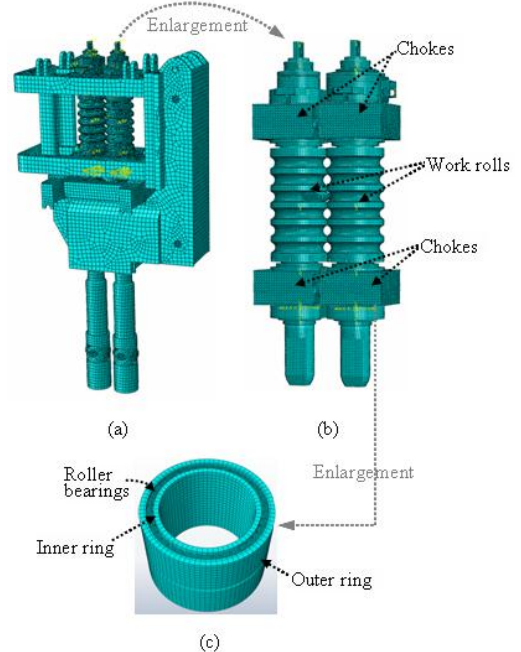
(a) FE mesh of actual stand of hot rod mill (b) FE mesh of work roll and choke structure (c) FE mesh of the inner ring, outer ring and roller bearing
